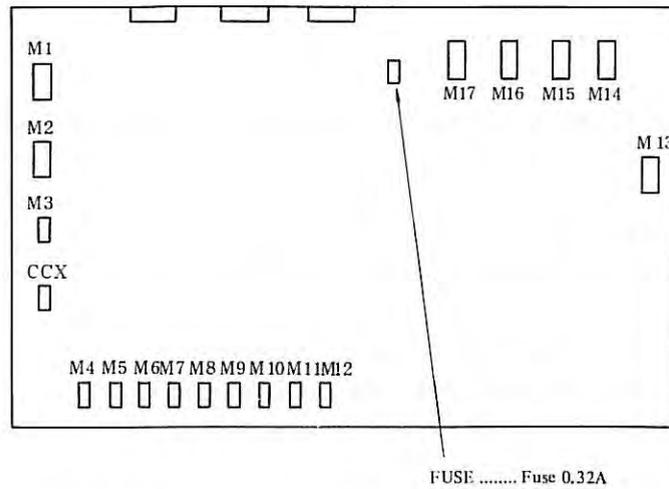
(c) Mounting Position of Master PCB Fuse
